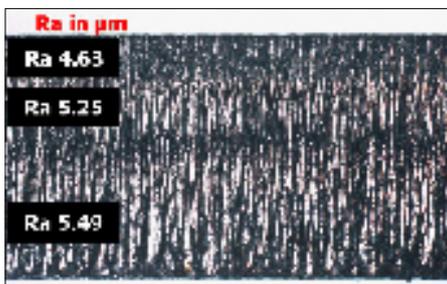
Typical cut surface on 6 mm stainless steel using a 2.2 kW Yb fibre laser [2]
